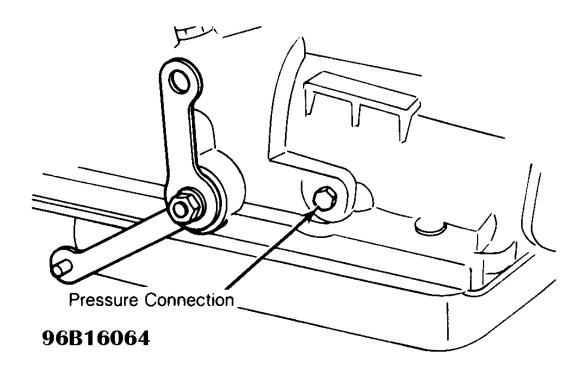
Control Pressure Outlet Location Courtesy of FORD MOTOR CO.
